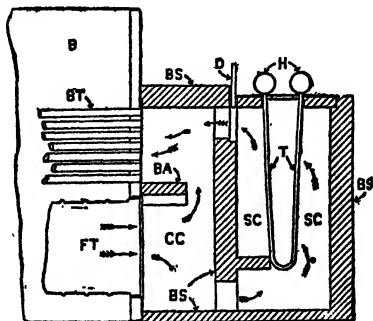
PROF. WATKINSON'S SUPERHEATER FOR DRYBACK LAND BOILERS.
